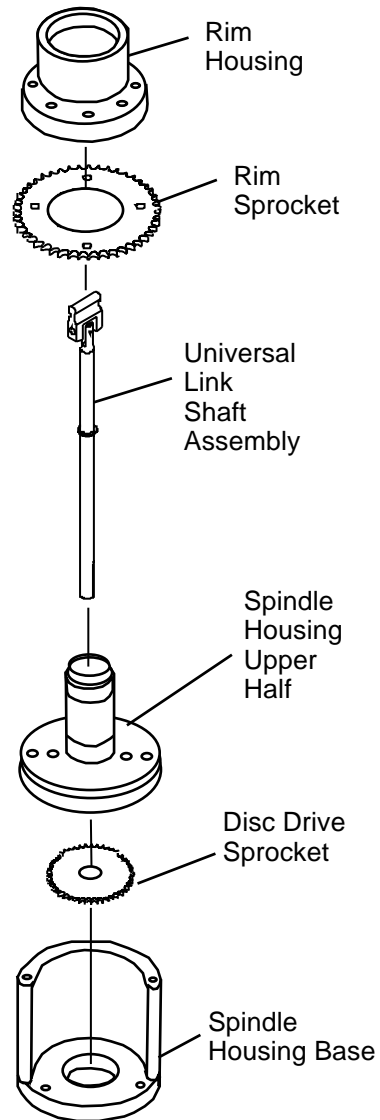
FS-40/50-RD Spindle Assembly - Exploded Views
